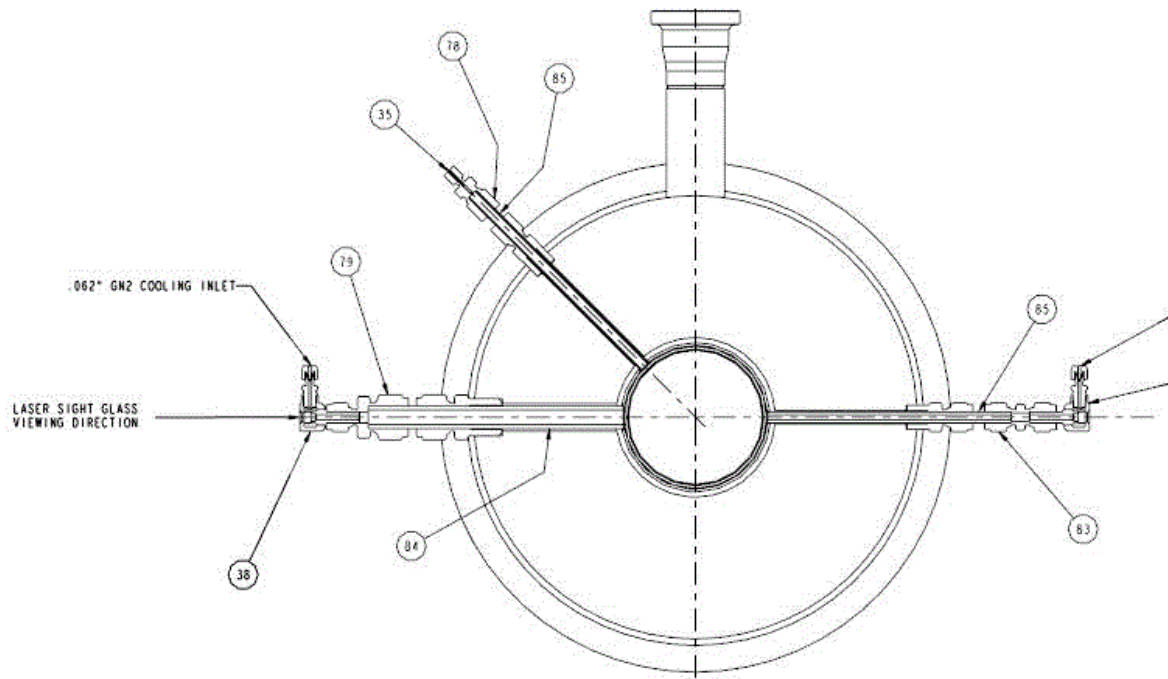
Simplified cross-section of the combustor rig showing the optical pathway through the combustor exhaust liner. Drawing is courtesy of PSI.
